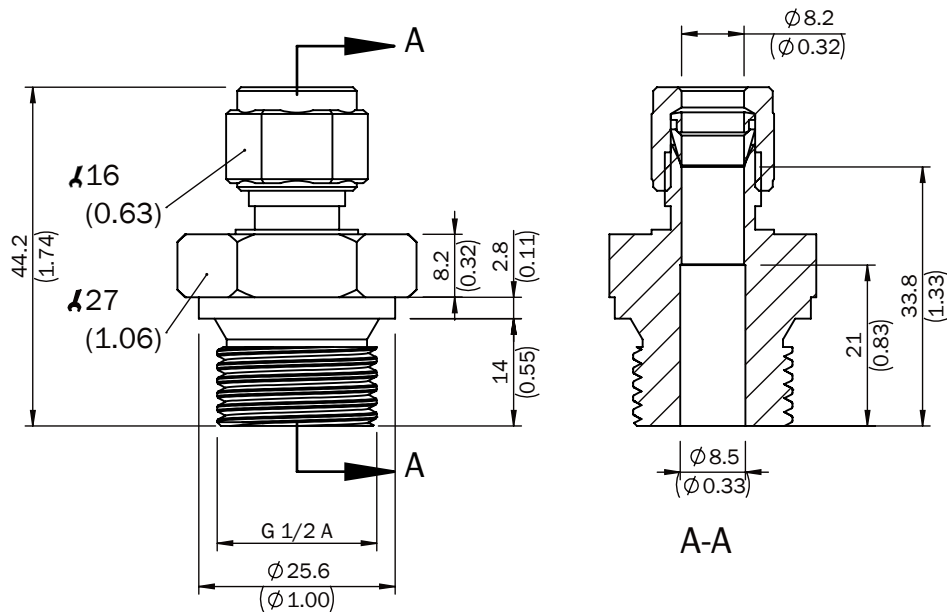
Dimensional drawing of G1/2 adapter (P/N 5338774)
